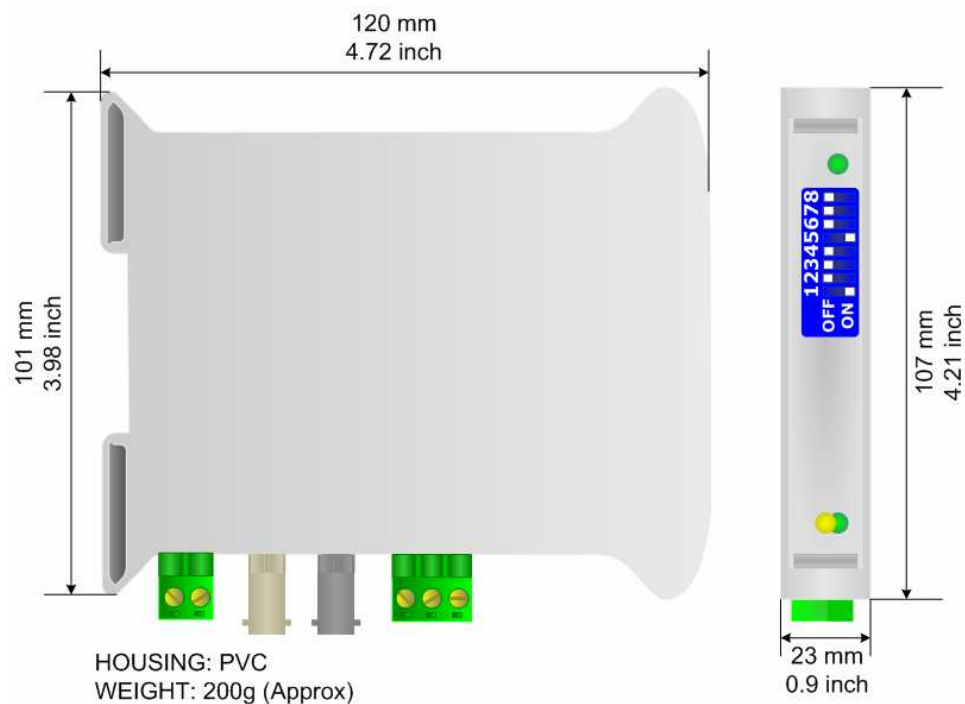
Mechanical Dimensions Scheme for HD67180F – HD67180FS
